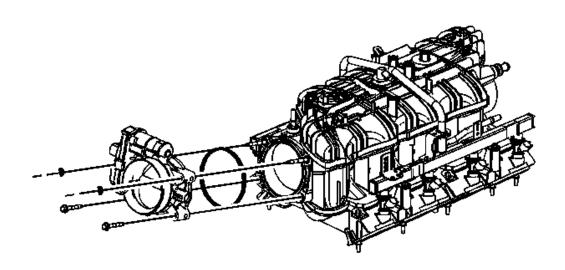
View Of Throttle Body, Gasket & Bolts/Nuts Courtesy of GENERAL MOTORS CORP.
